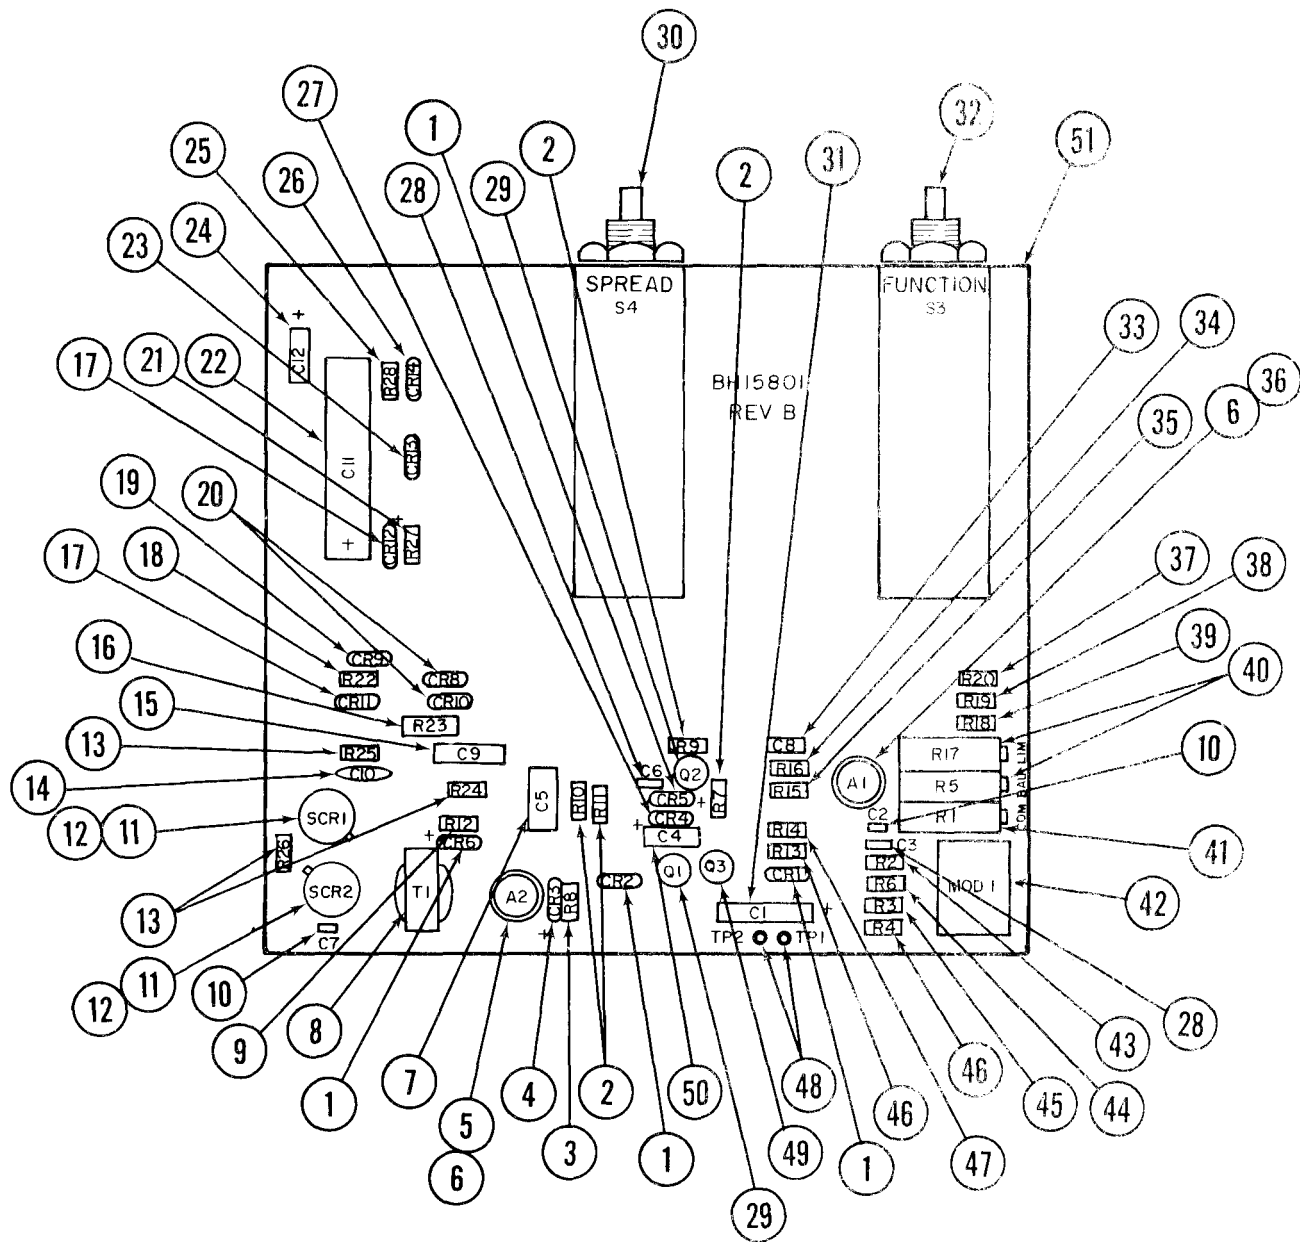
BH15801-1 Probe Control-Function Switch Circuit Board Assembly.
